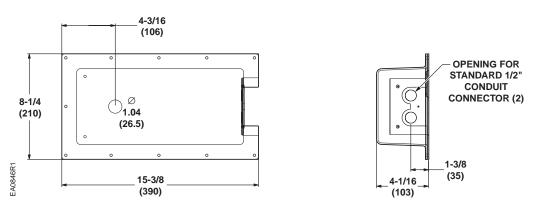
Dimensions of the ASK75.1U Weather Shield in Inches (Millimeters).
